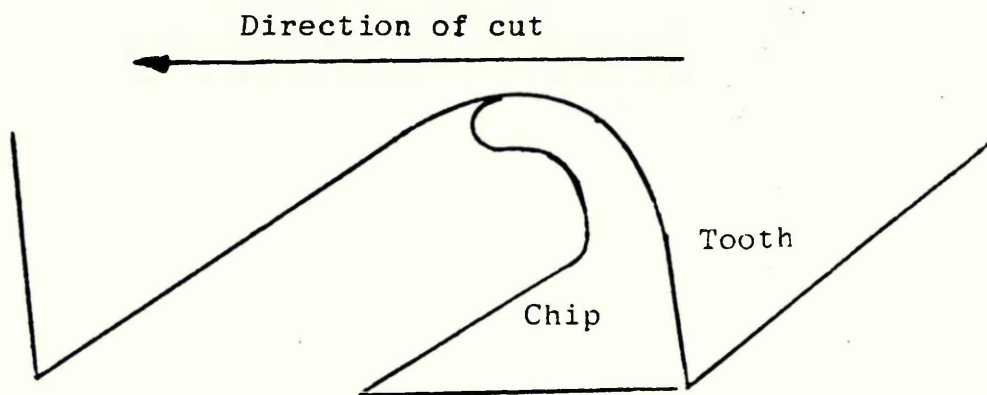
Curly chips cut by a 4 TPI blade.
